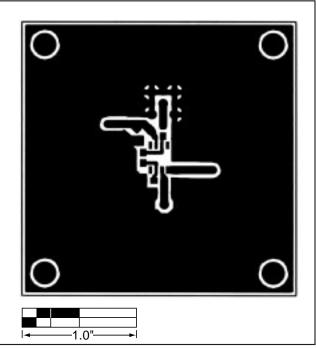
MAX4104 EV Kit PC Board Layout—Component Side
